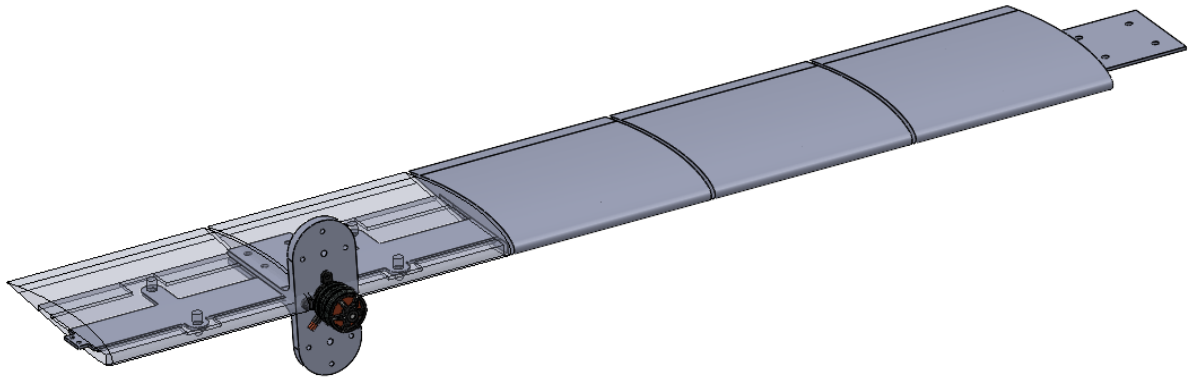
Wing assembly showing the propeller motor and the propeller bracket
